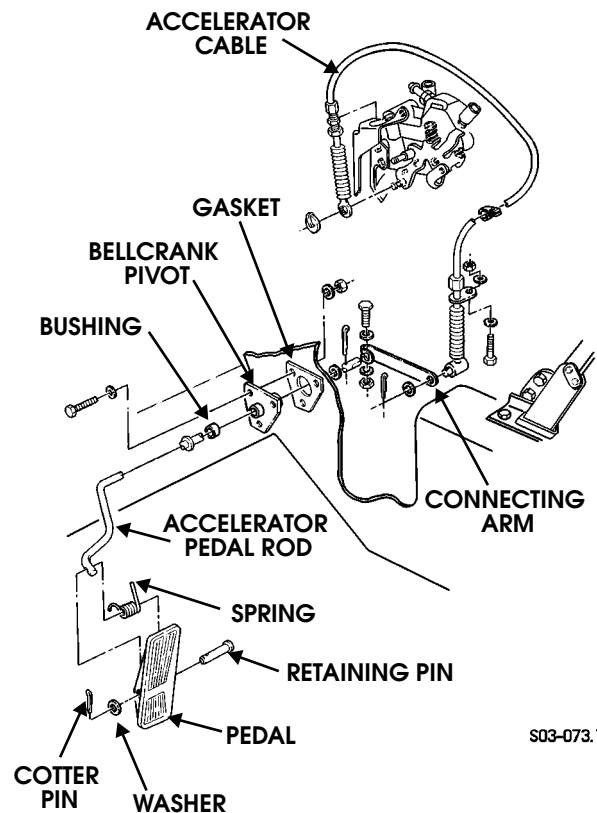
Accelerator Pedal Control Pad Removal/Installation
